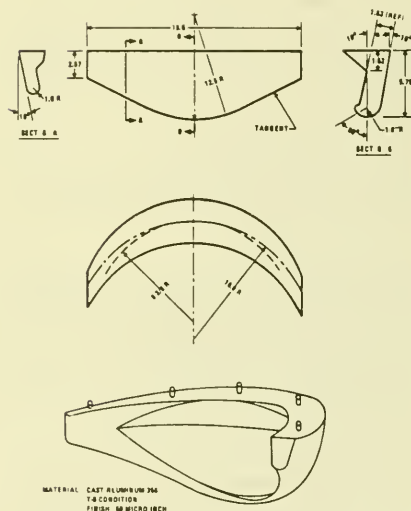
A — Diagram of Bead Unseating Block Dimensions in Inches
